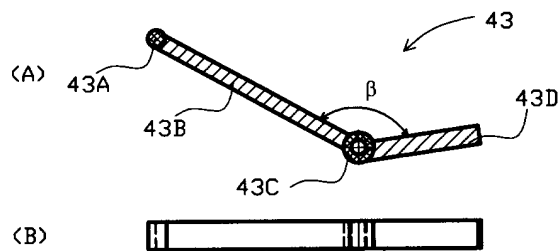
Sectional view (A) and top view (B) of lever 43 of the trigger one
